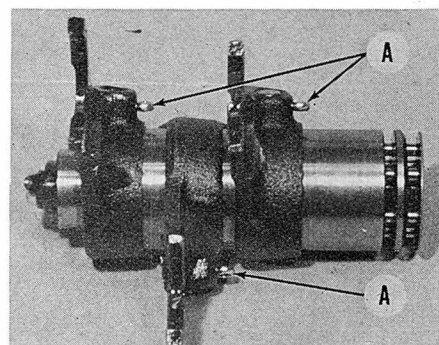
Note position of cotter pin heads (A) on shift forks. Tangs must be bent flat.
